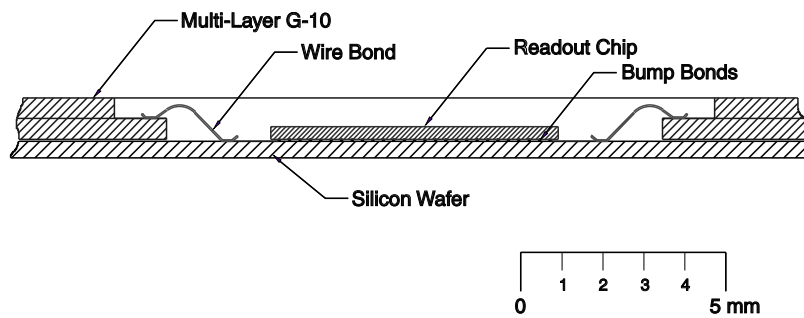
Cross-sectional view in the vicinity of the readout chip.
